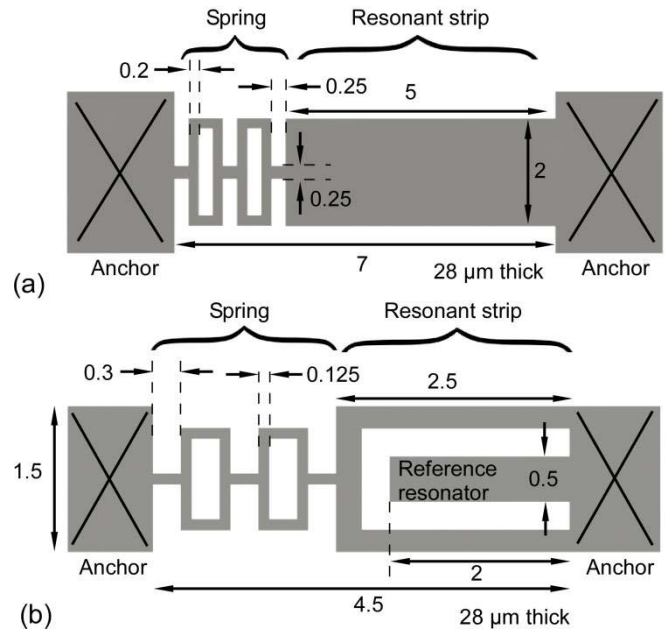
Sensor designs: (a) Single sensor; (b) differential sensor. All dimensions in mm.
